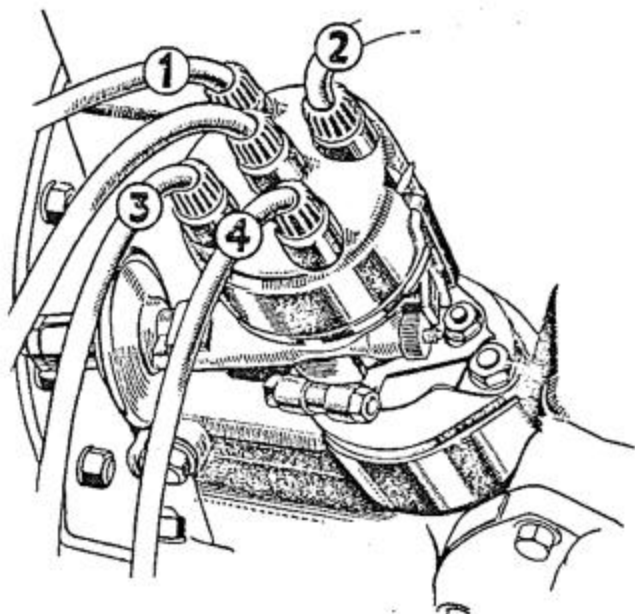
Showing ignition timing adjuster and wiring of distributor
